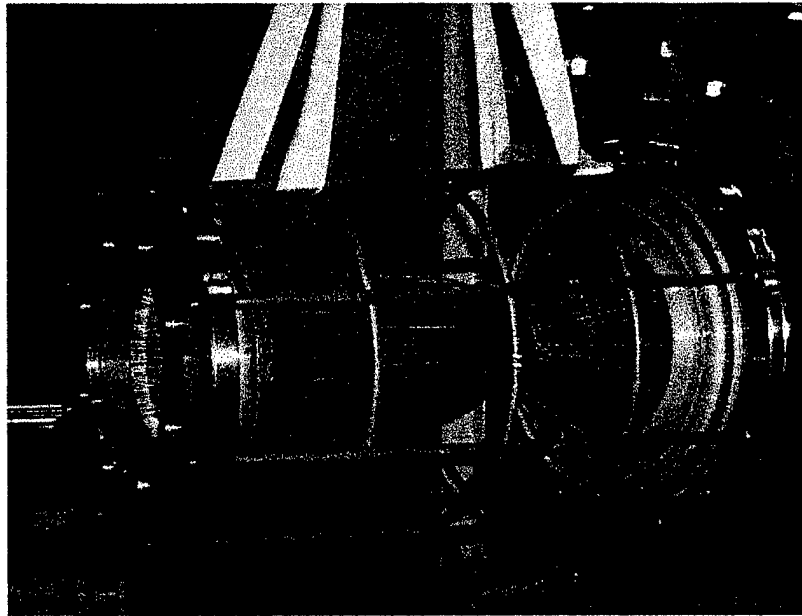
Assembled Copper Tube bundle Prior to Braze
